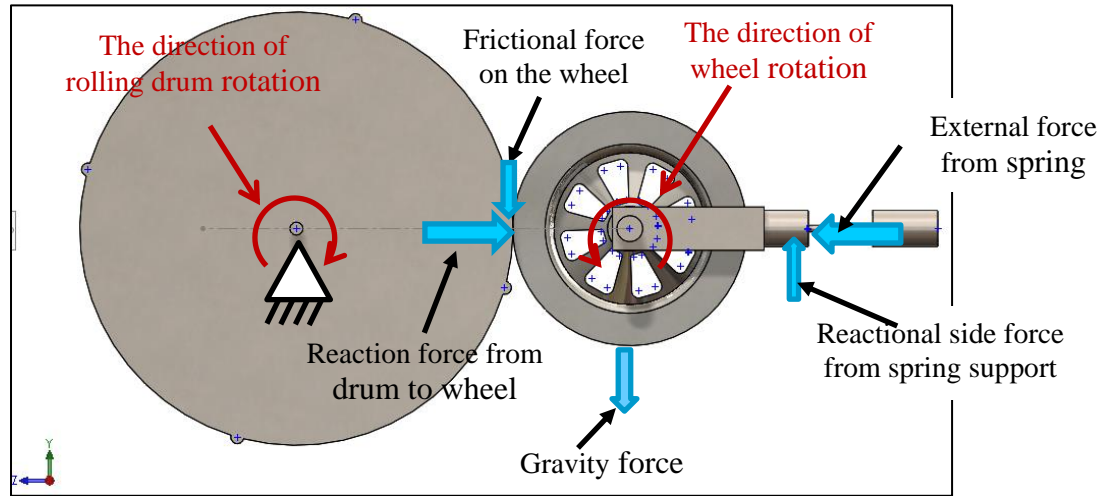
Free Body Diagram (FBD) of Wheel Assembly
